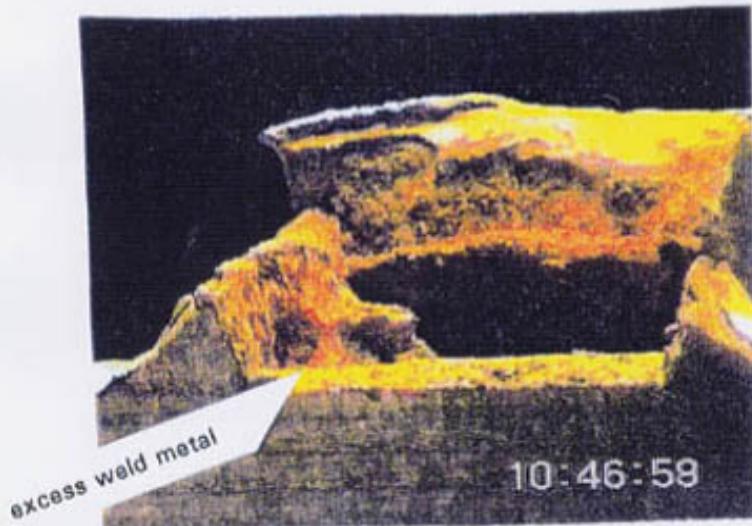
a: Transition from weld crack to hingeplate crack at recovered bushing
